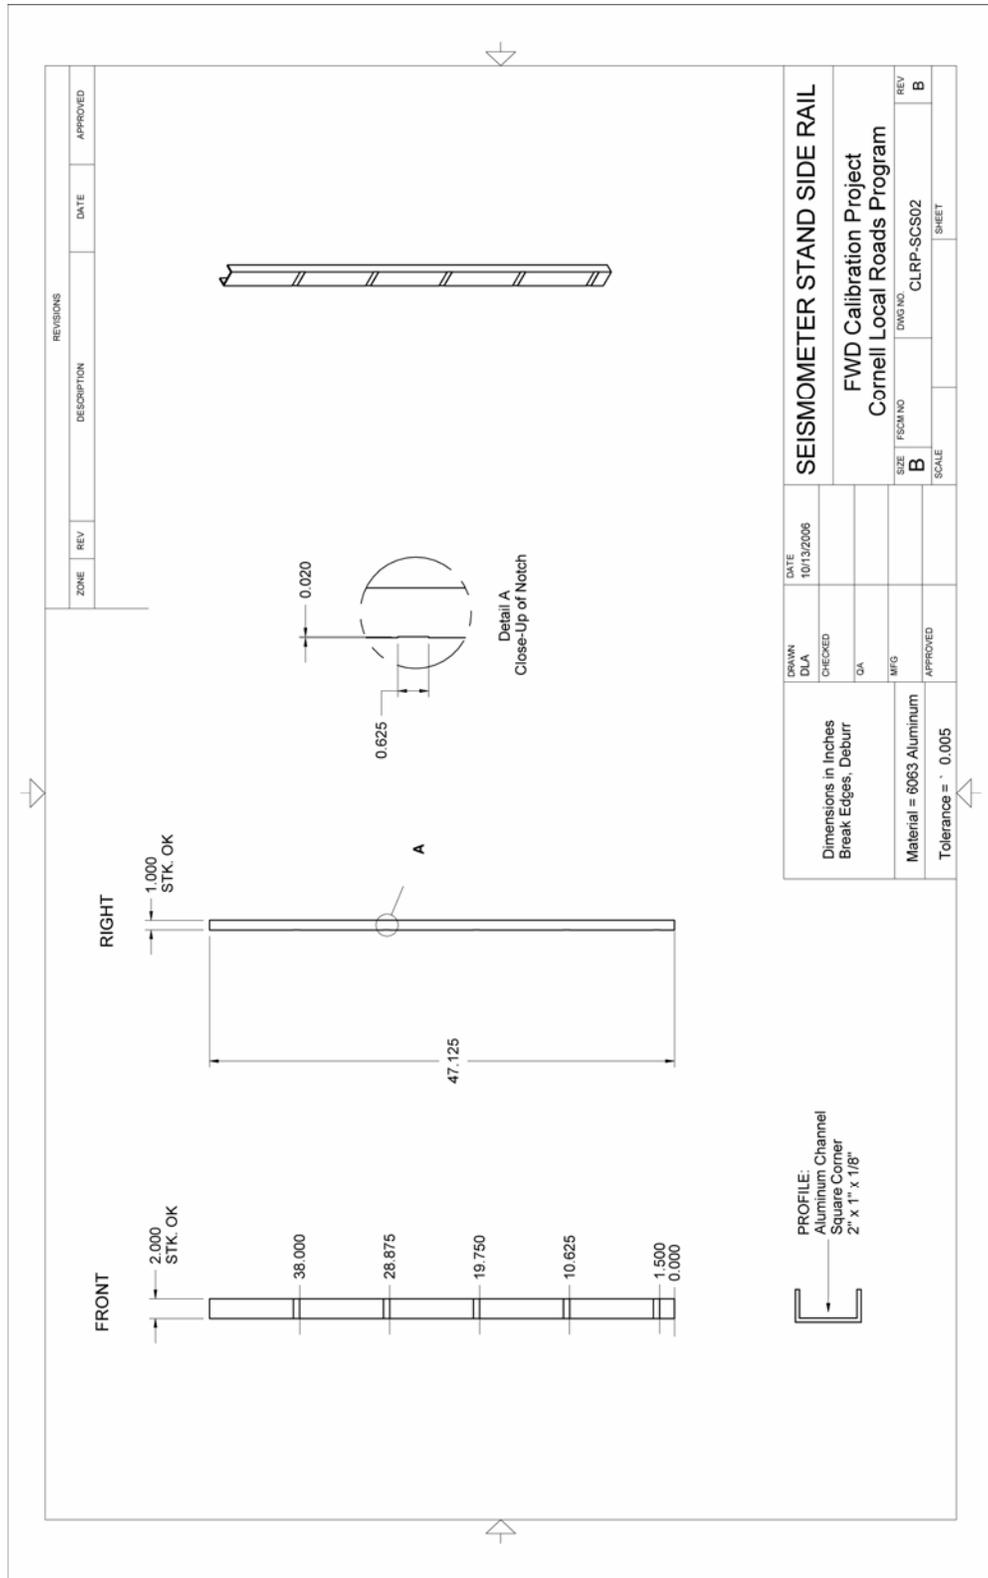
Drawing. CLRP-SCS02 Seismometer Stand Side Rail.
